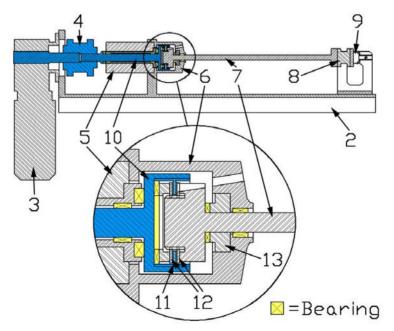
Simplified cross-section of the test apparatus. Shaded parts are rotating during operation.
